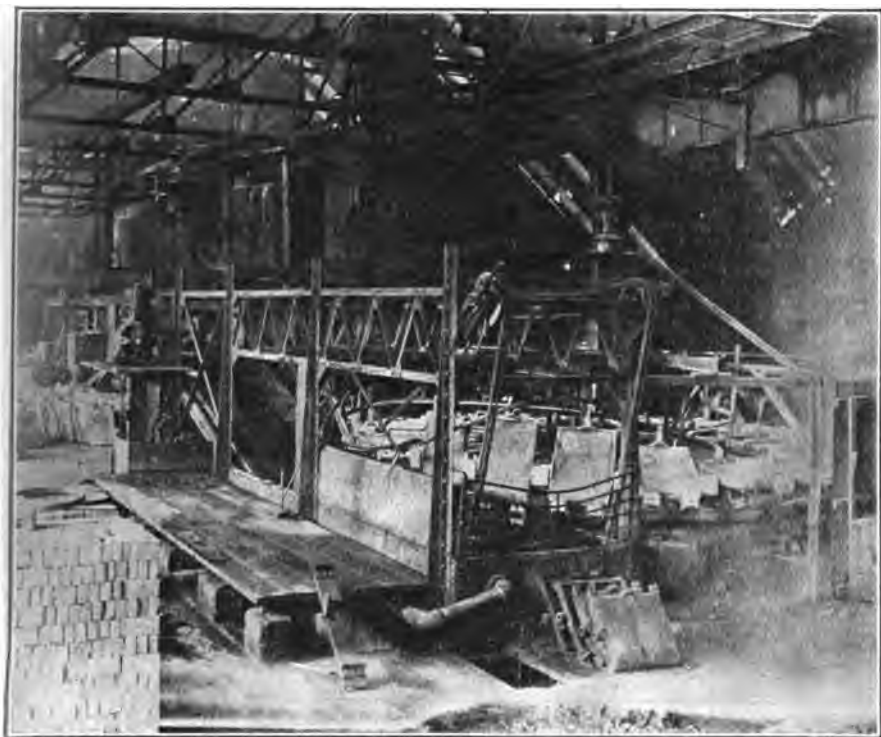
GENERAL VIEW OF CASTING MACHINE.
